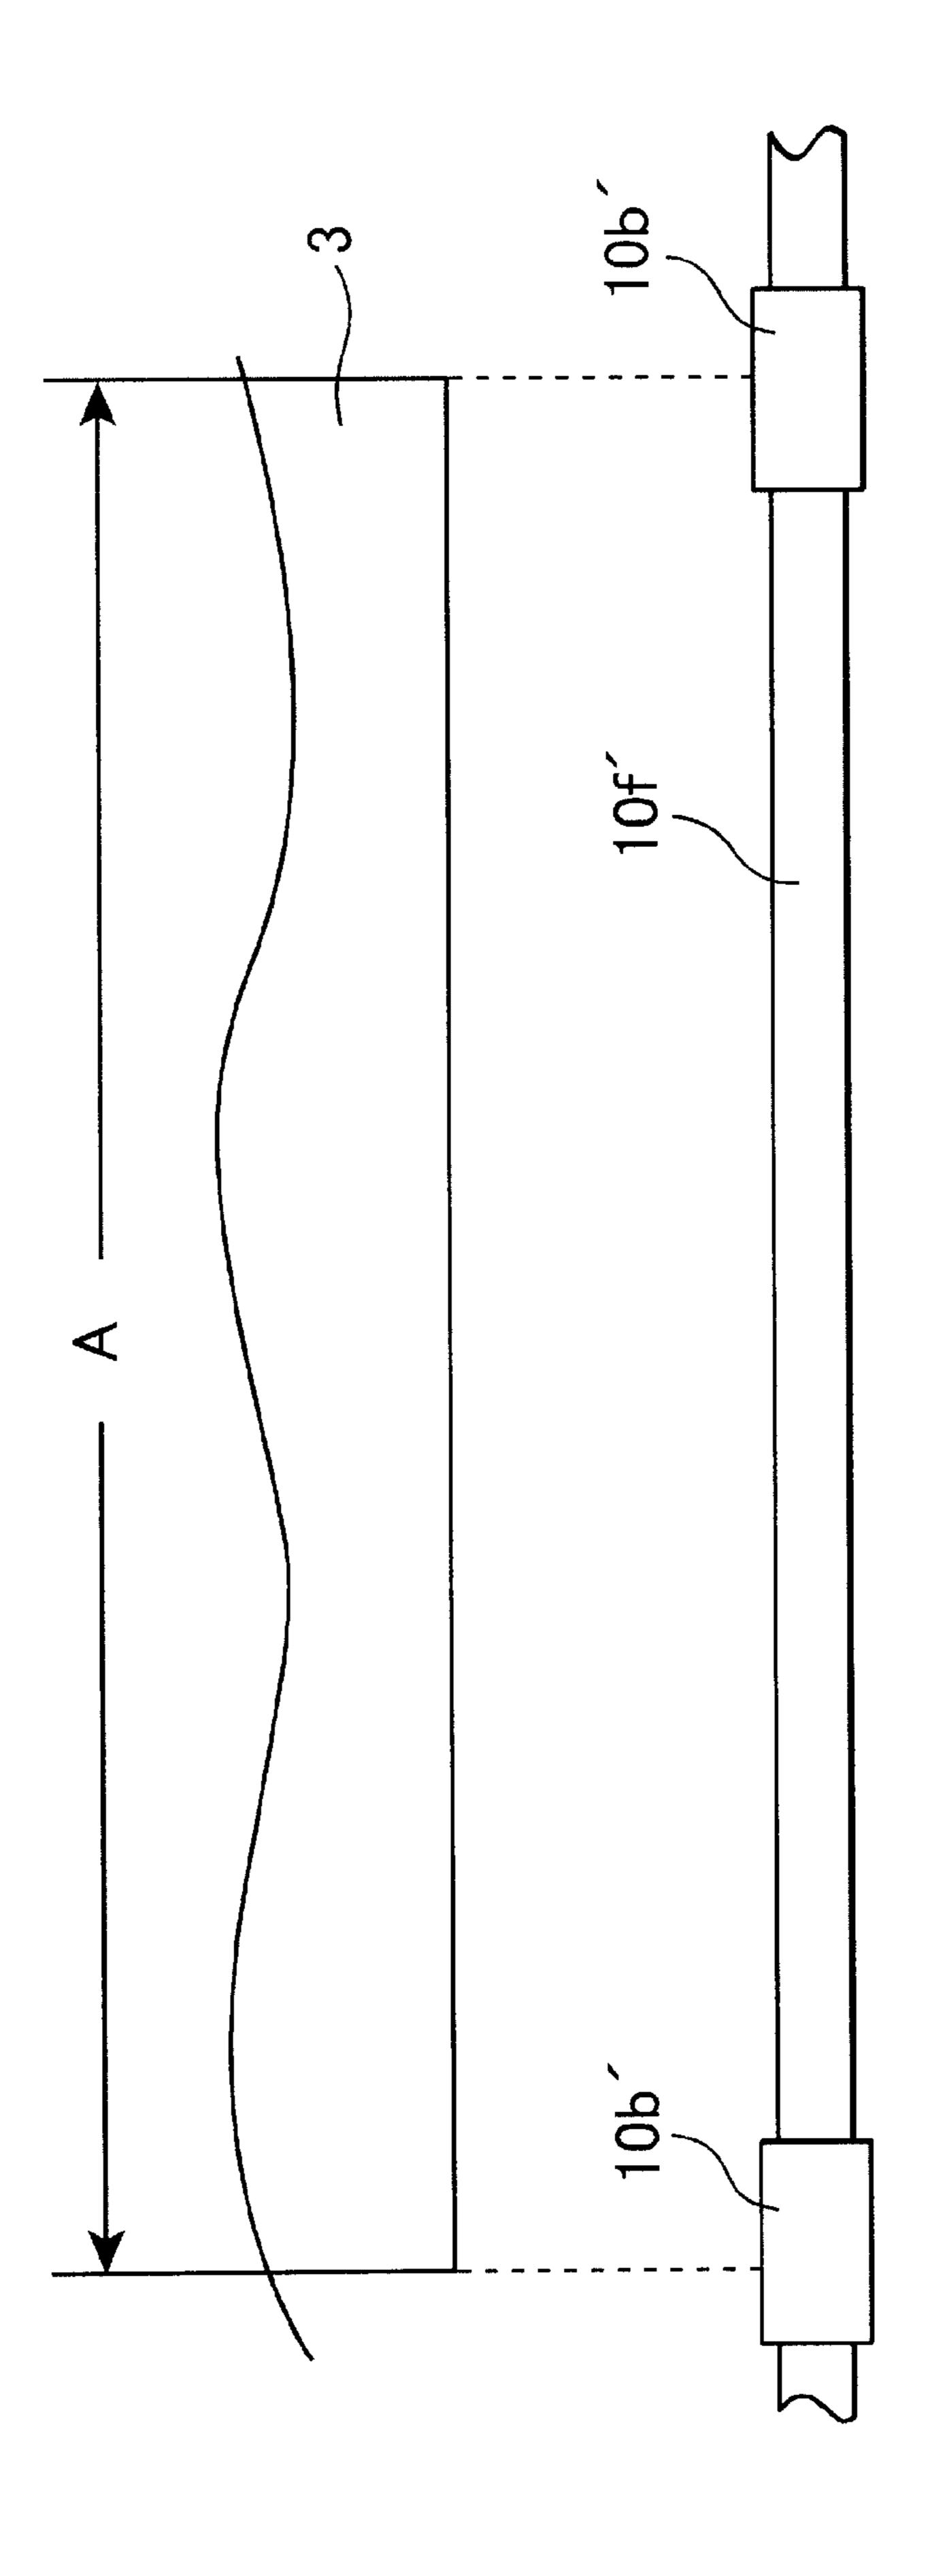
IMAGE FORMING DEVICE HAVING PAPER DUST REMOVING UNITS
